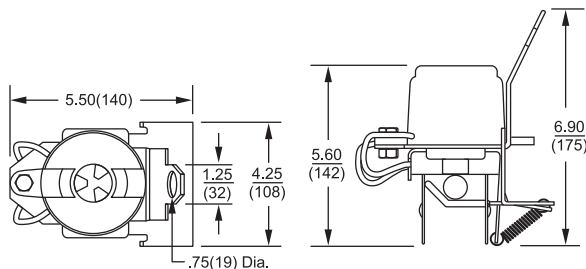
Figure A — Indicator with Attached Sensor. Hotstick Mounting.
